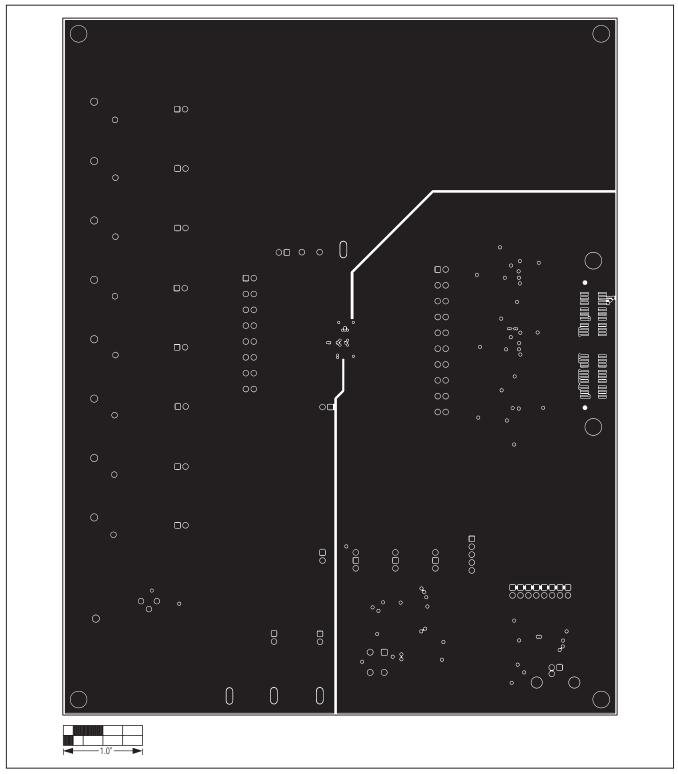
MAX19527 EV Kit PCB Layout—Solder Side
